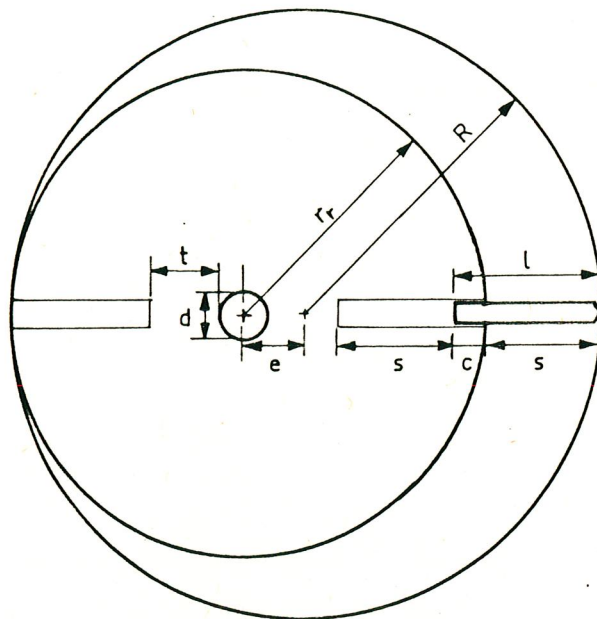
4. Dimensions of a Sliding Vane Type Machinery
